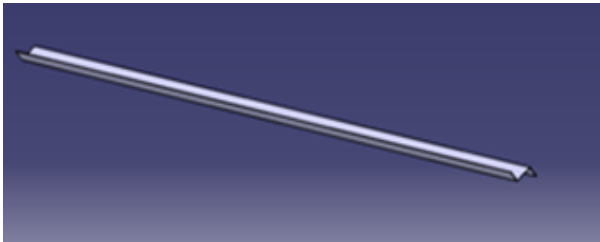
Stringers can be of any shape, in this paper a Z section stringer is chosen
